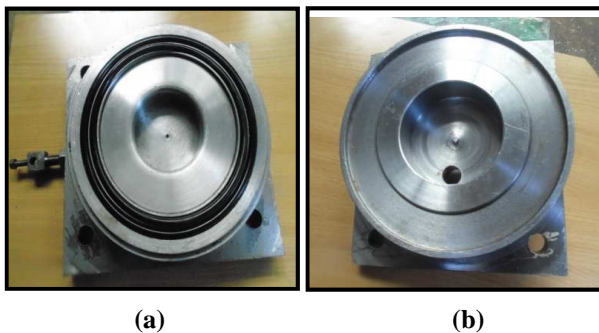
Hydroforming Die (a) lower die (b)upper die.
